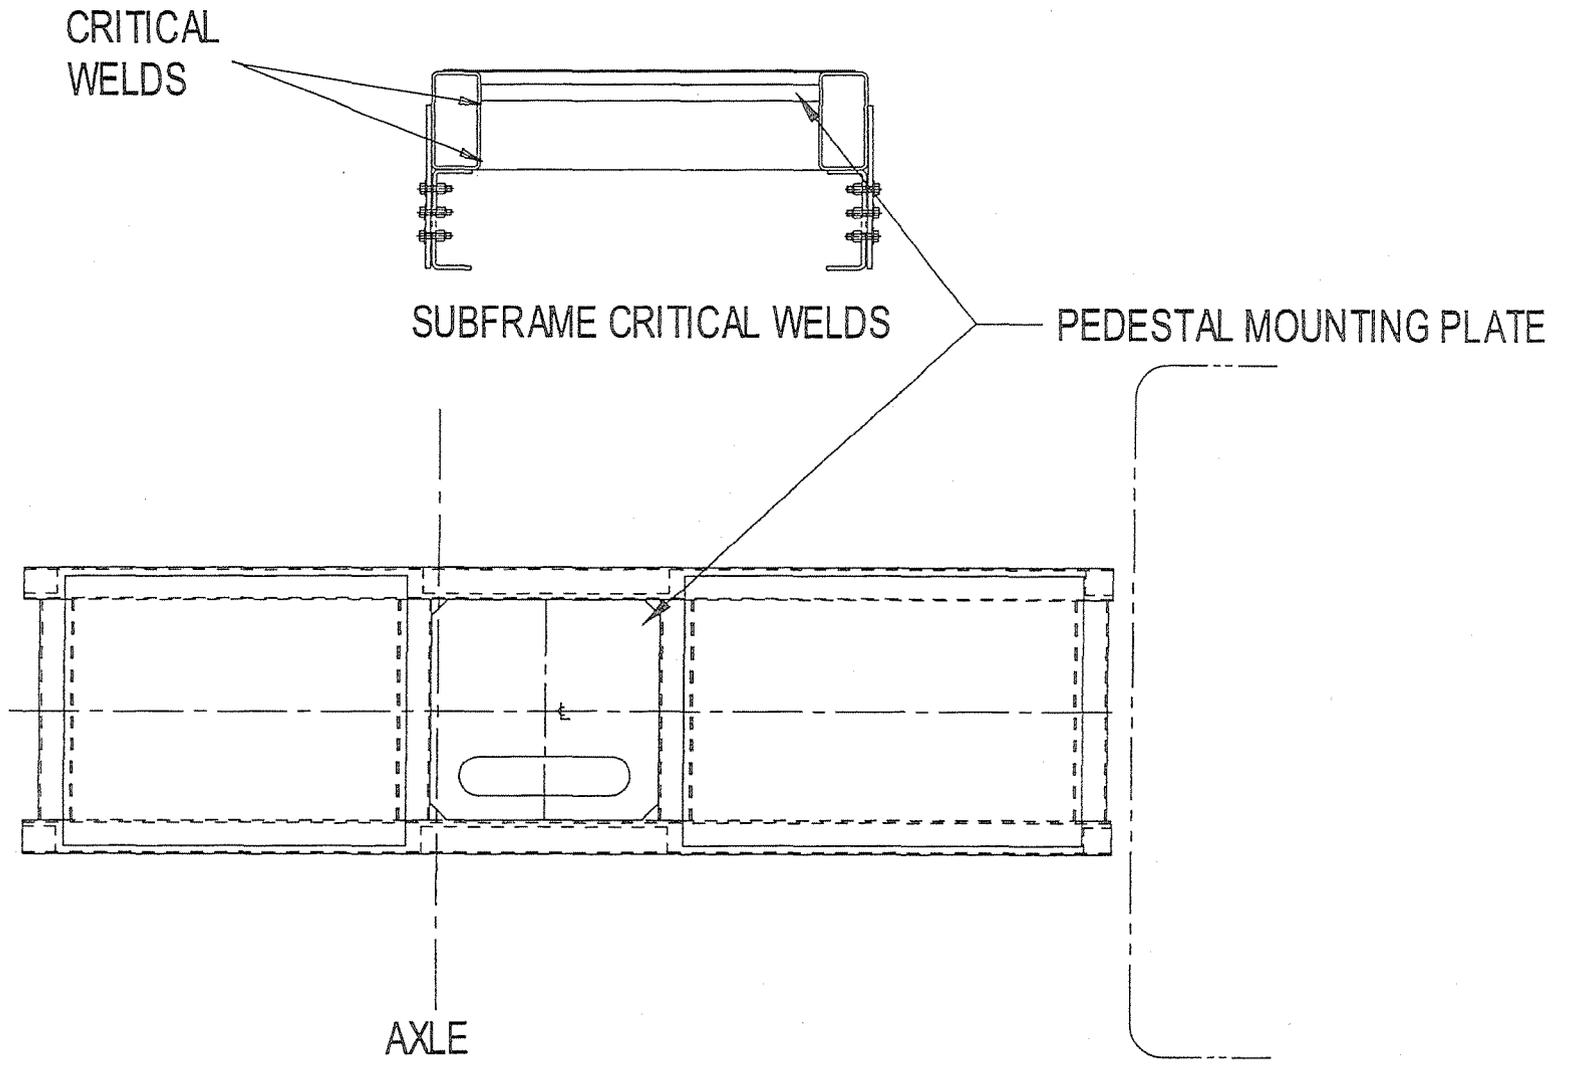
B- SUBFRAME WELD INSPECTIONS
